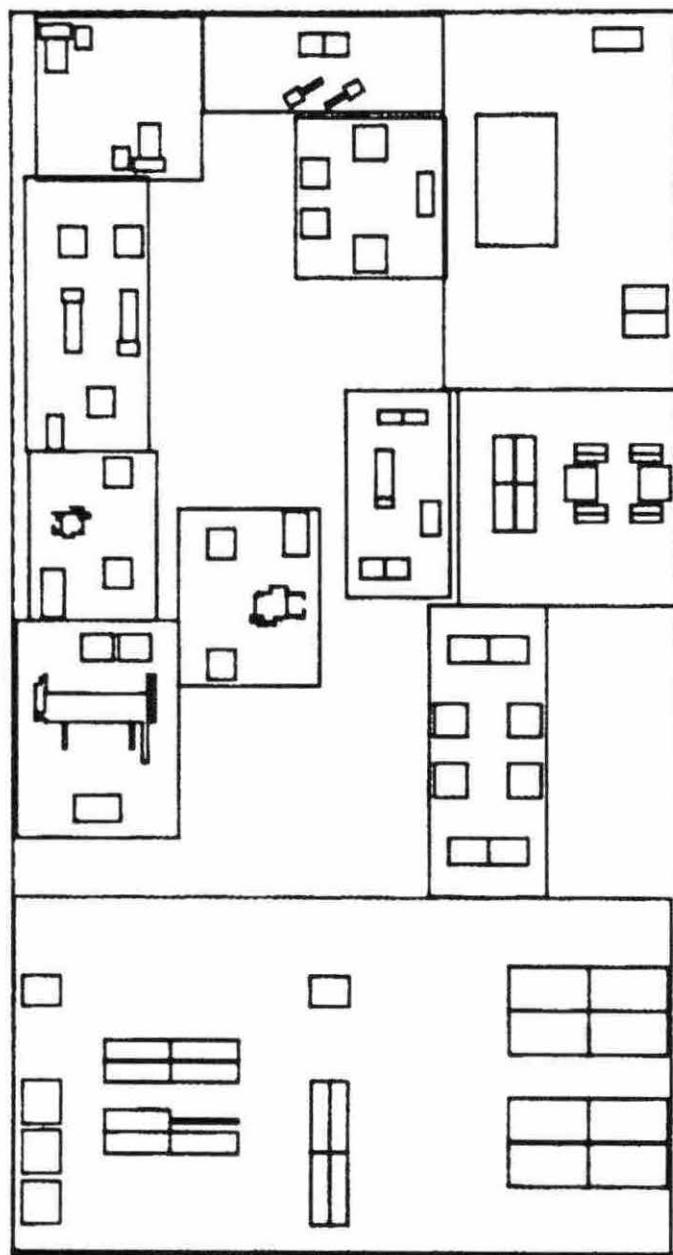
Ronko Manufacturing Company FLAY layout - improved version
